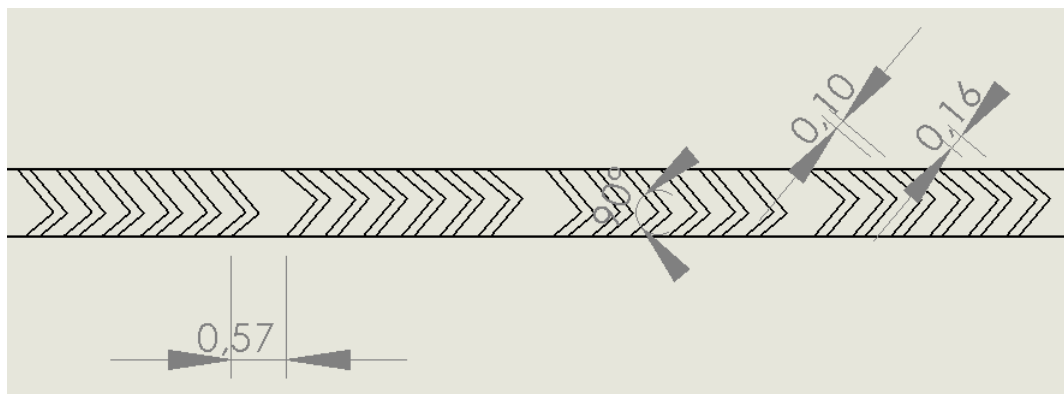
Drawing in SolidWorks of Staggered Herringbone Mixer, zoomed in on herringbone grooves
